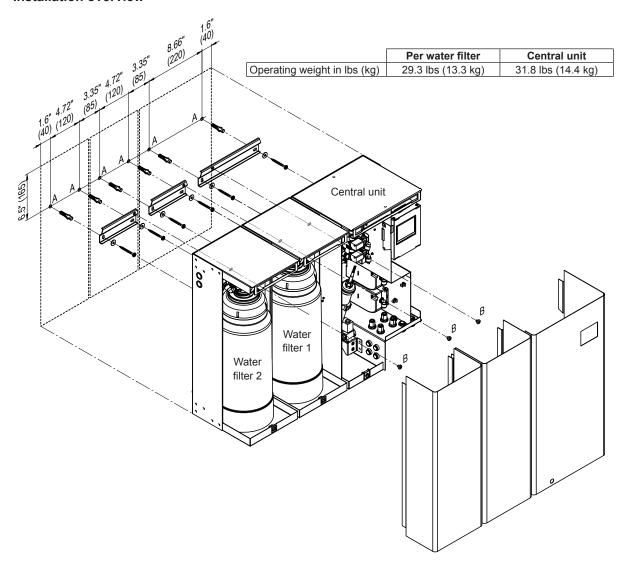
Central unit installation overview (dimensions in inch (mm), illustration shows installation with screws and dowels)
